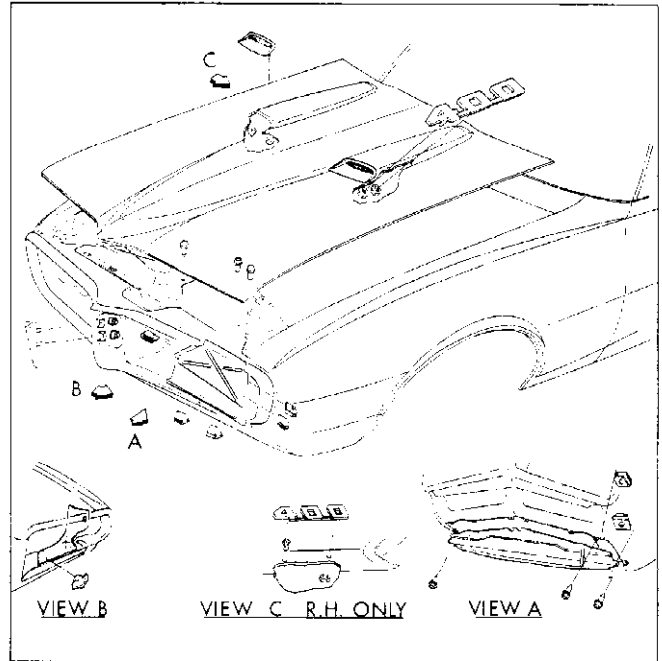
Chassis Sheet Metal - 400 Sport Option
